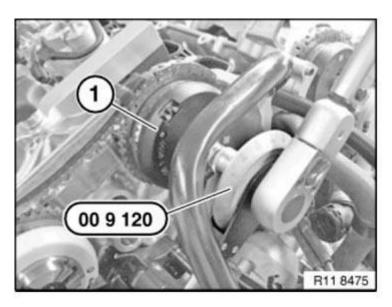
Tightening Exhaust Camshaft Adjuster Central Bolt Courtesy of BMW OF NORTH AMERICA, INC.
